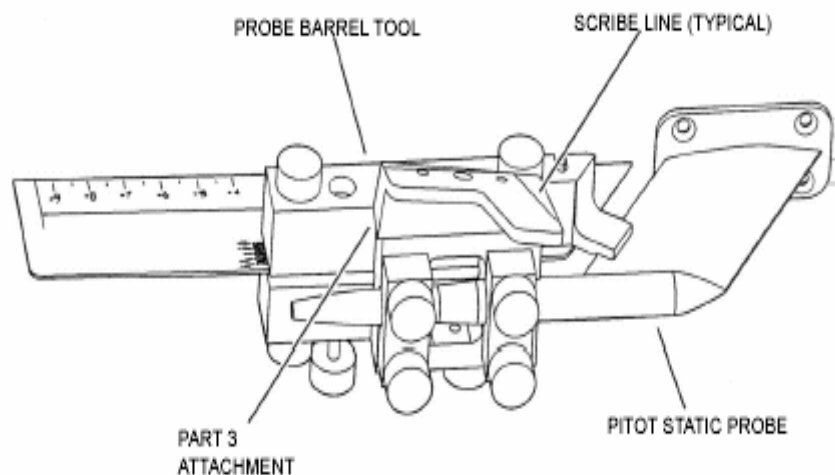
, Rosemount Pitot Static Probe Alignment Tool
